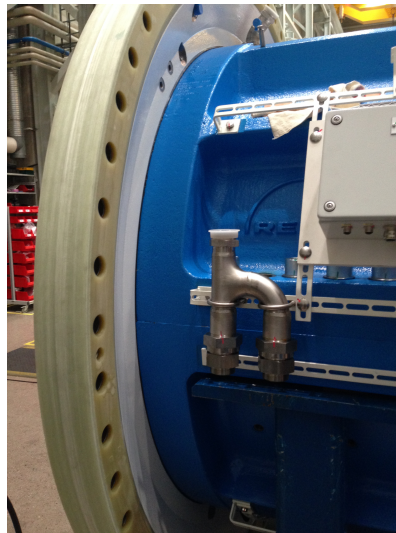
Thrust bearing system with insulation, radial bearing and slide thrust bearing.
